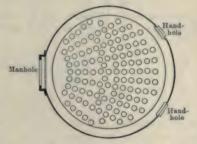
Radial Arrangement in Tubes in a Vertical Boiler.
